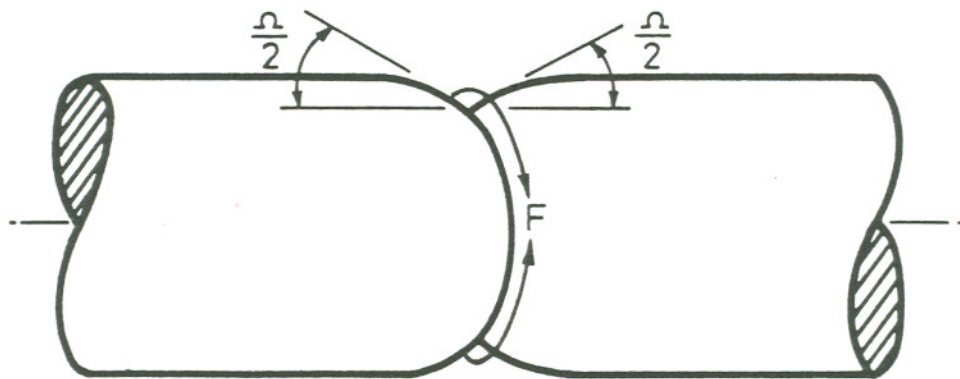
Shrinkage Parameters Ω and F for a Pipe Girth Weld (123)
